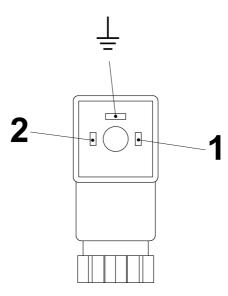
Pin assignment, plug socket, normally-open contact (Form 15x50)
